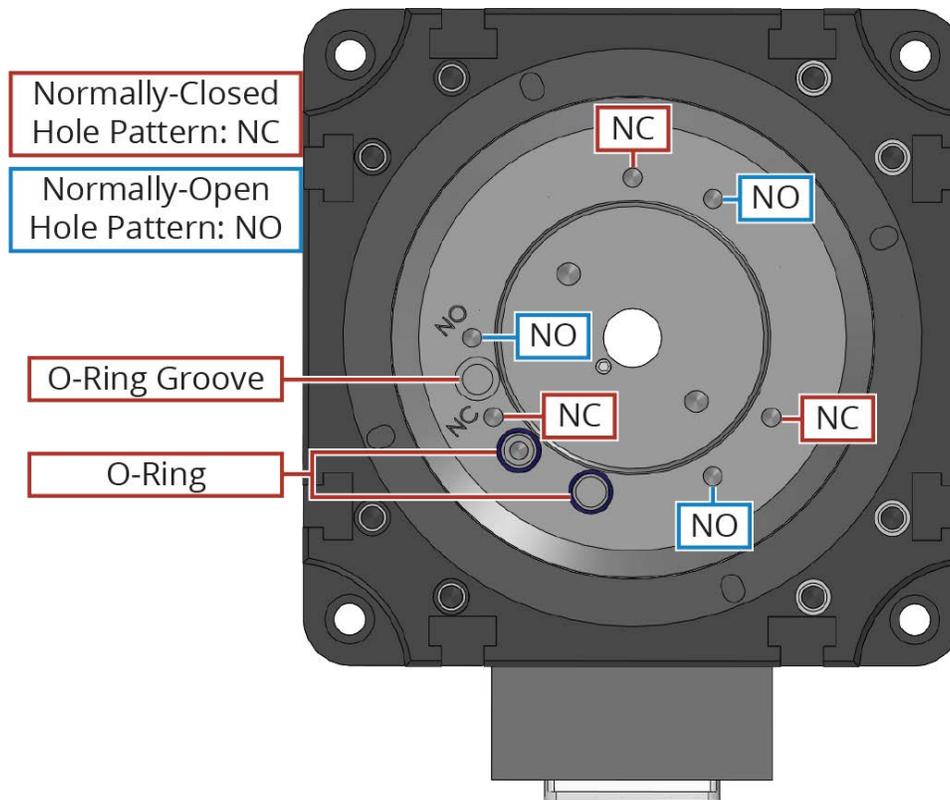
Gripper Mounting Hole Locations in ACS Shaft
